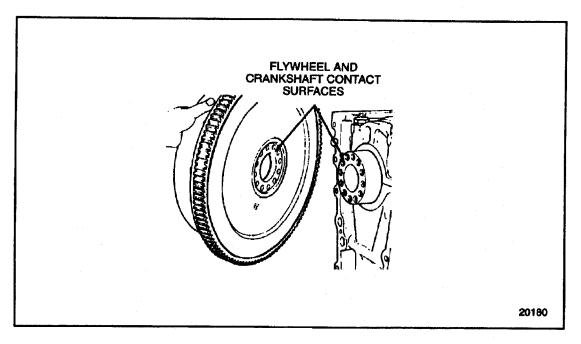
Crankshaft and Flywheel Mating Surfaces
